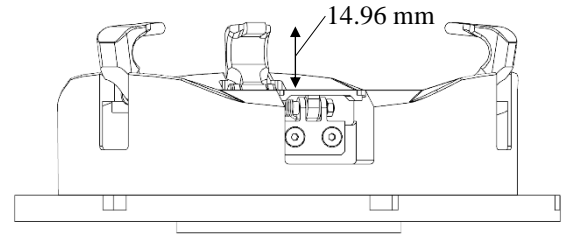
Latch fully deployed and axial tolerance to capture.
